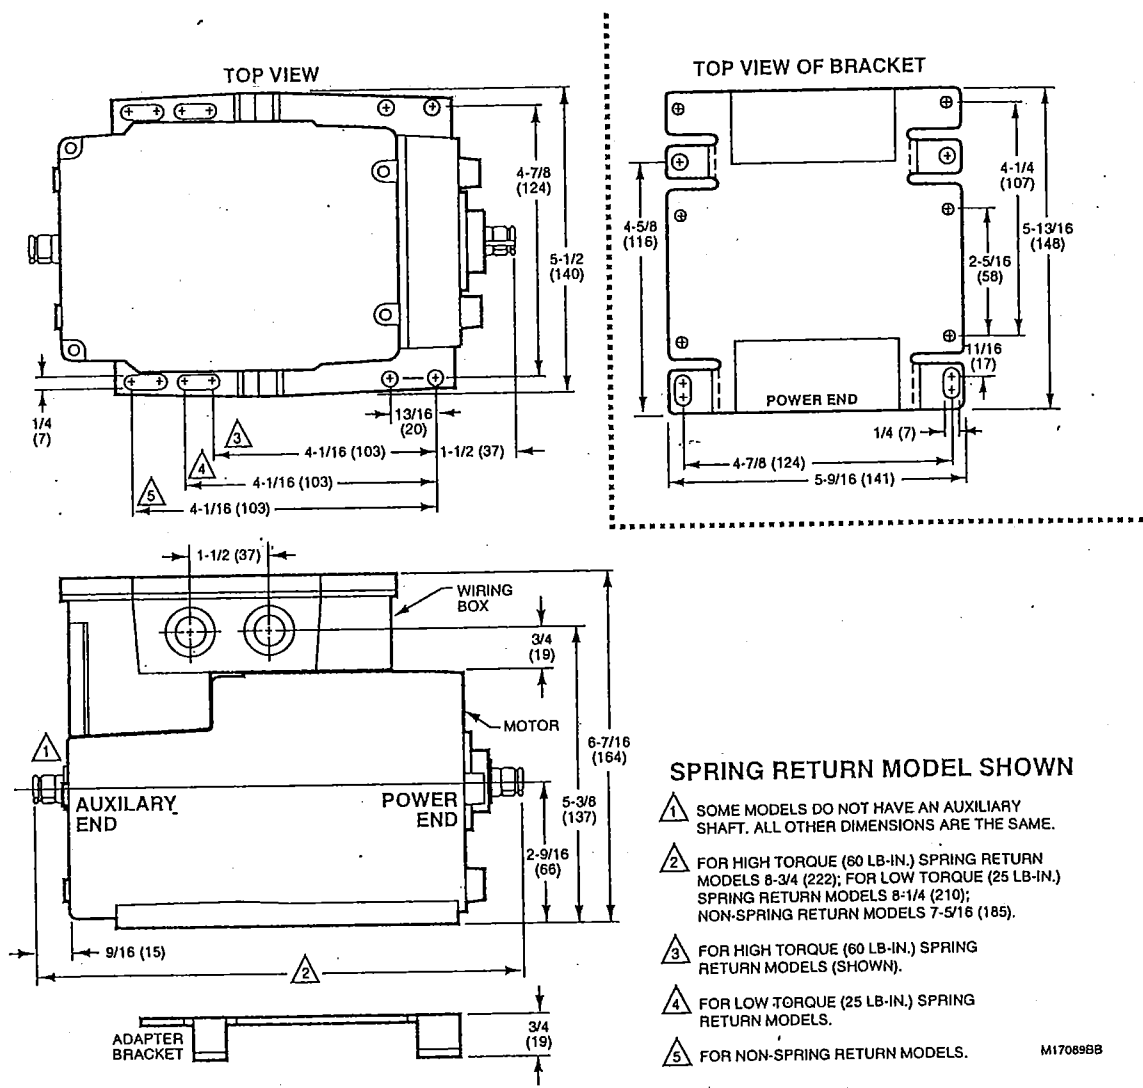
Series 72 Modutrol IV Motor dimensions in in. (mm).
